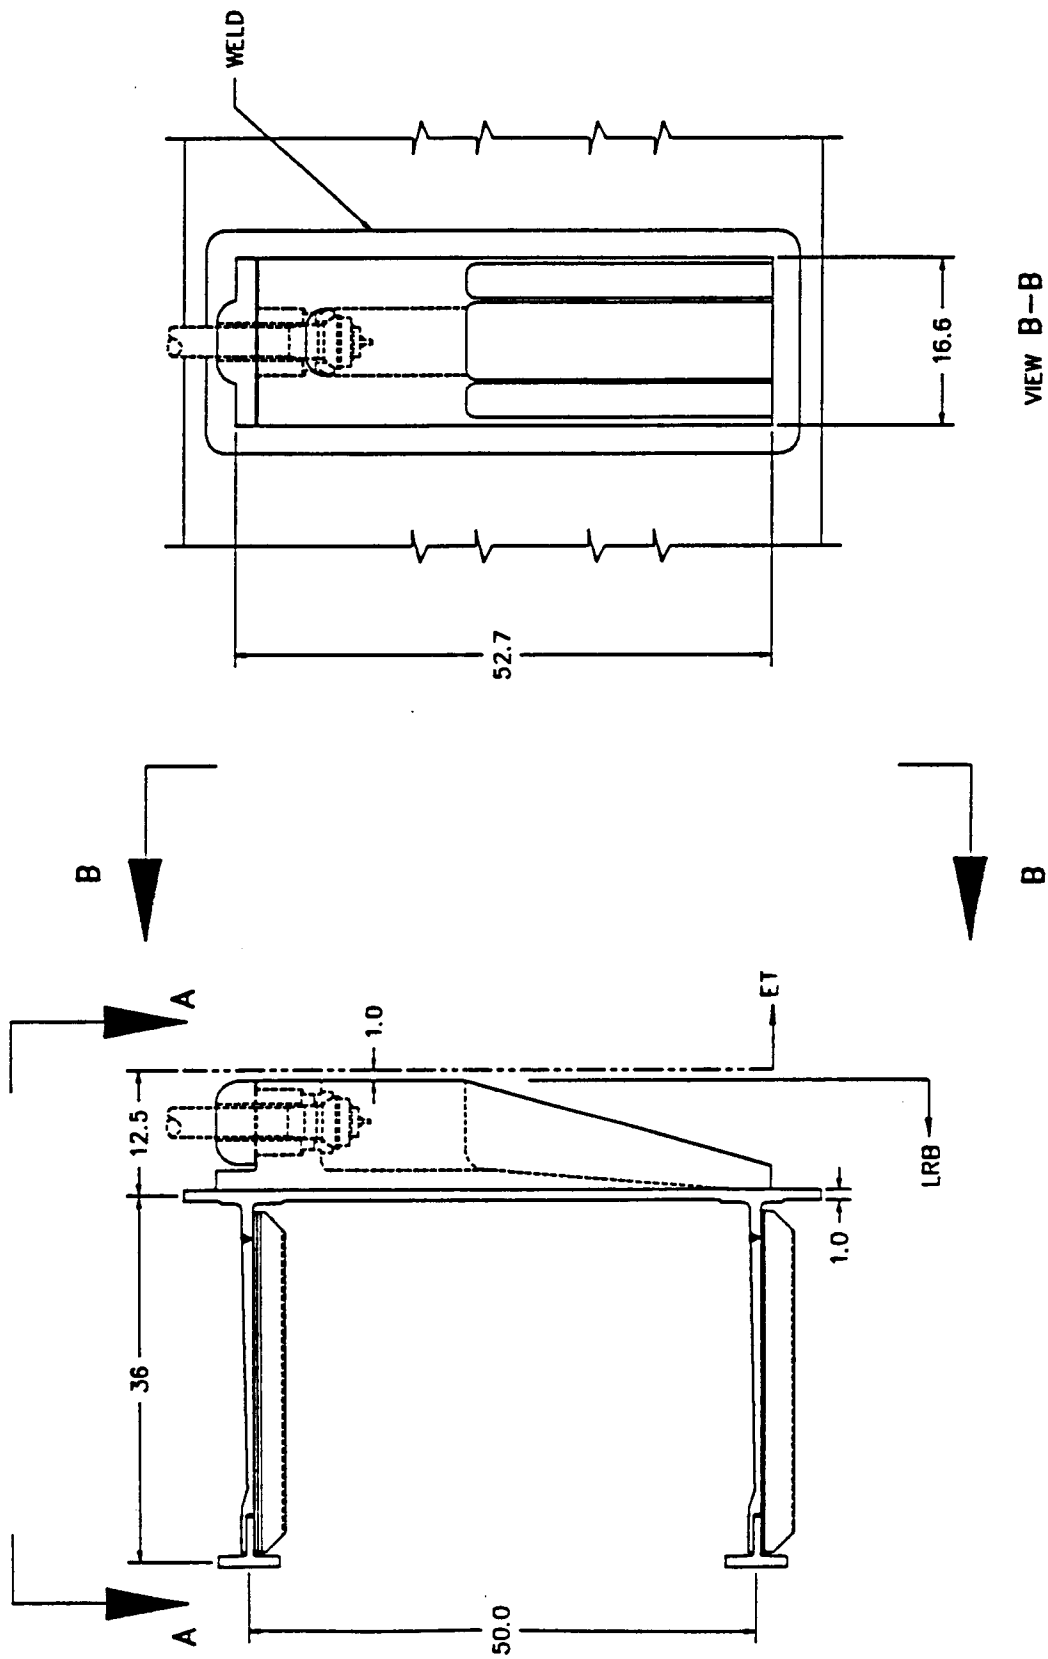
Forward ET Attachment Assembly (Side View)
